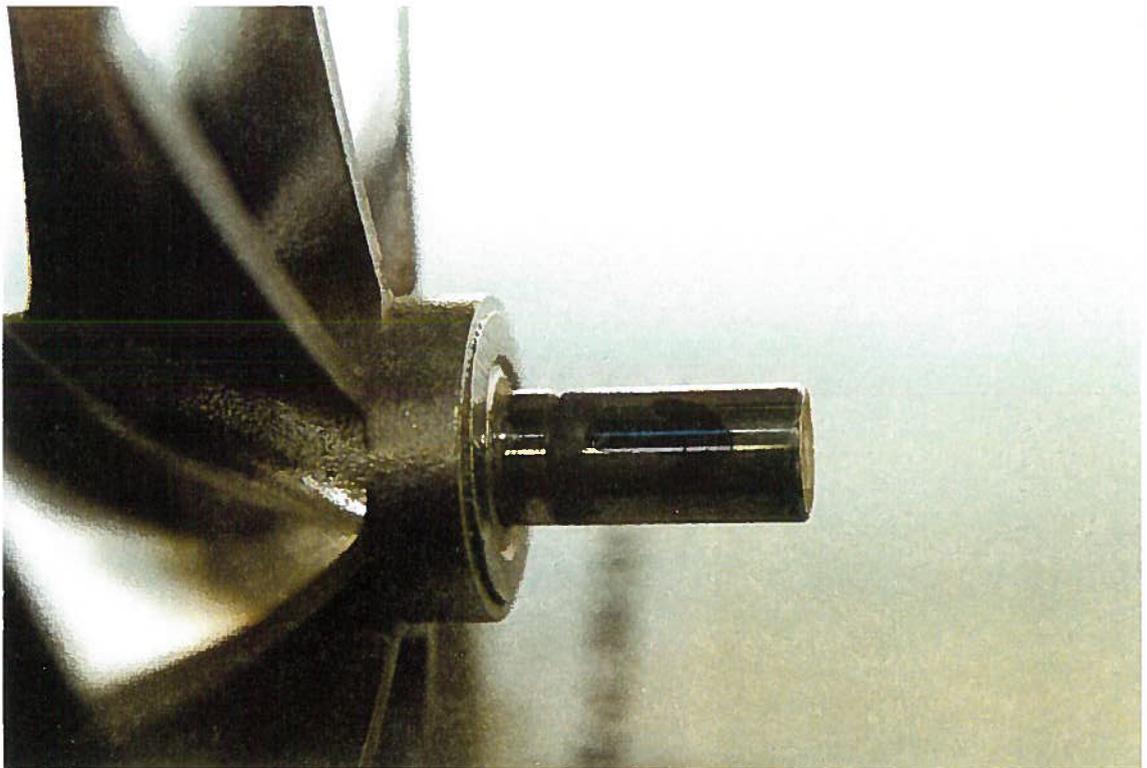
MANUFACTURER B. 100 mm DIAMETER METER, ROTOR SHAFT WEAR
